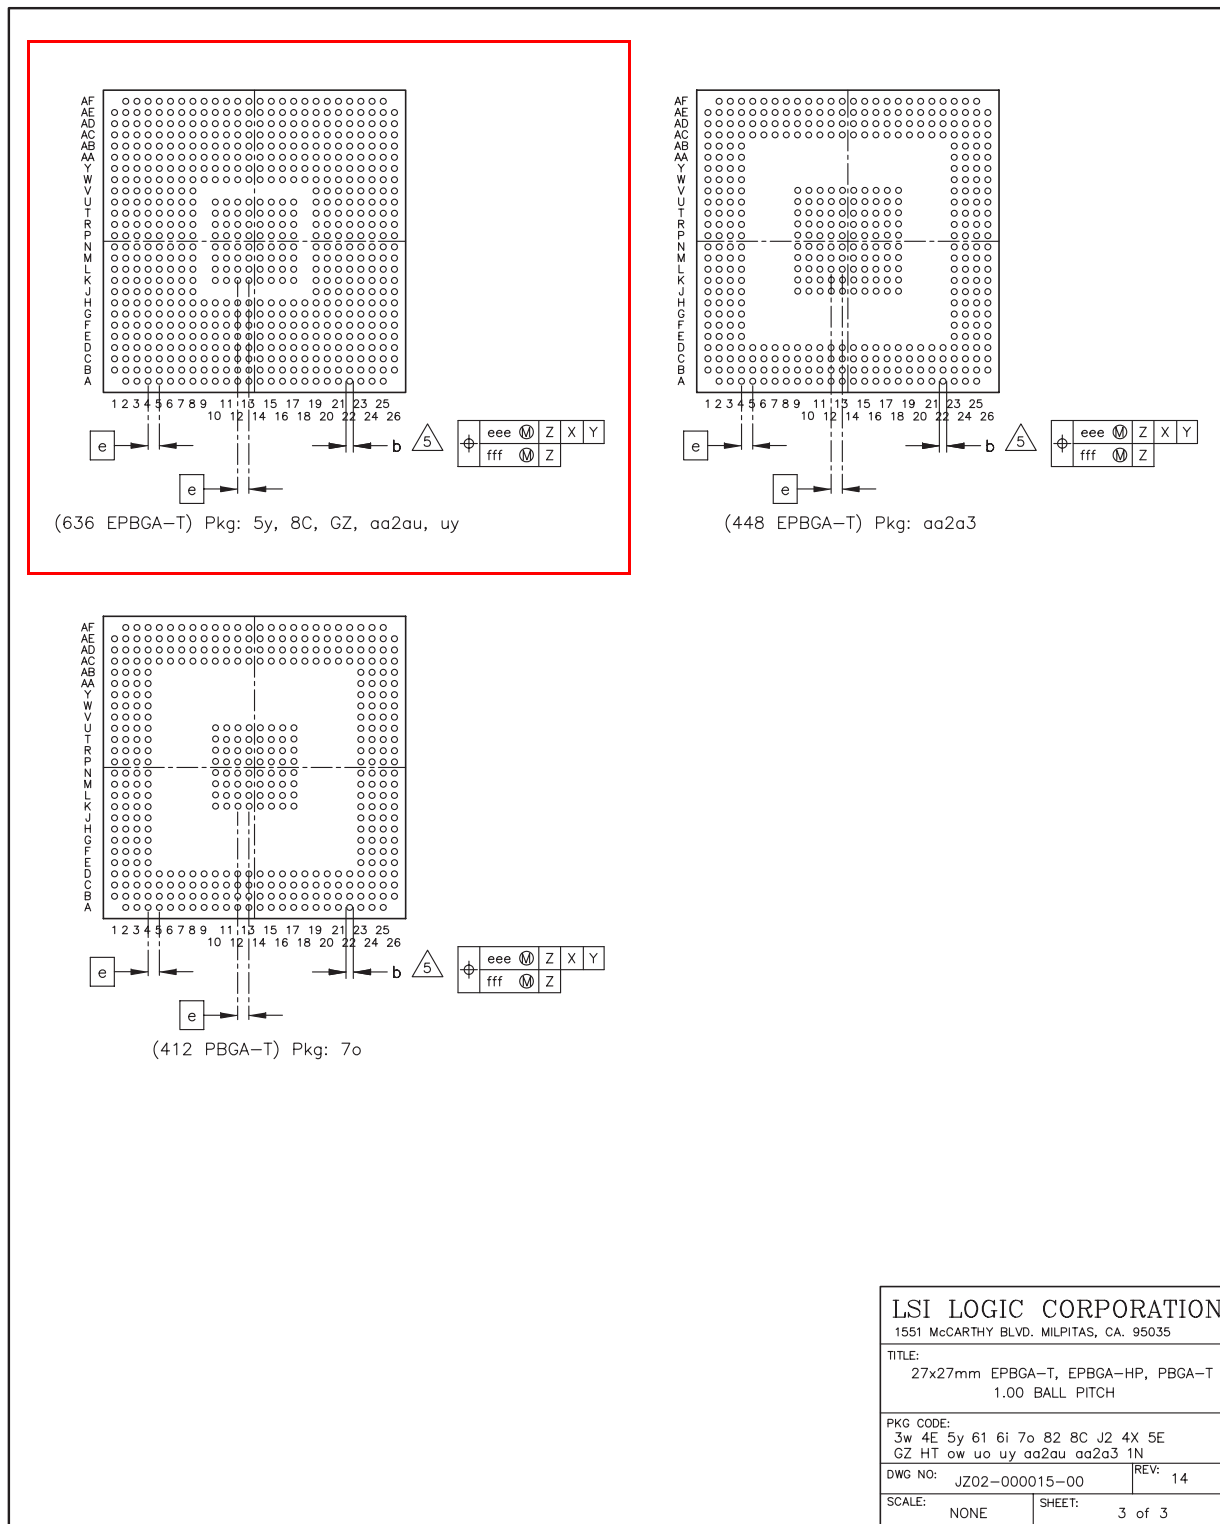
636-Ball EPBGA-T (8C) Mechanical (Sheet 2 of 3); Bottom View (Cont.)
